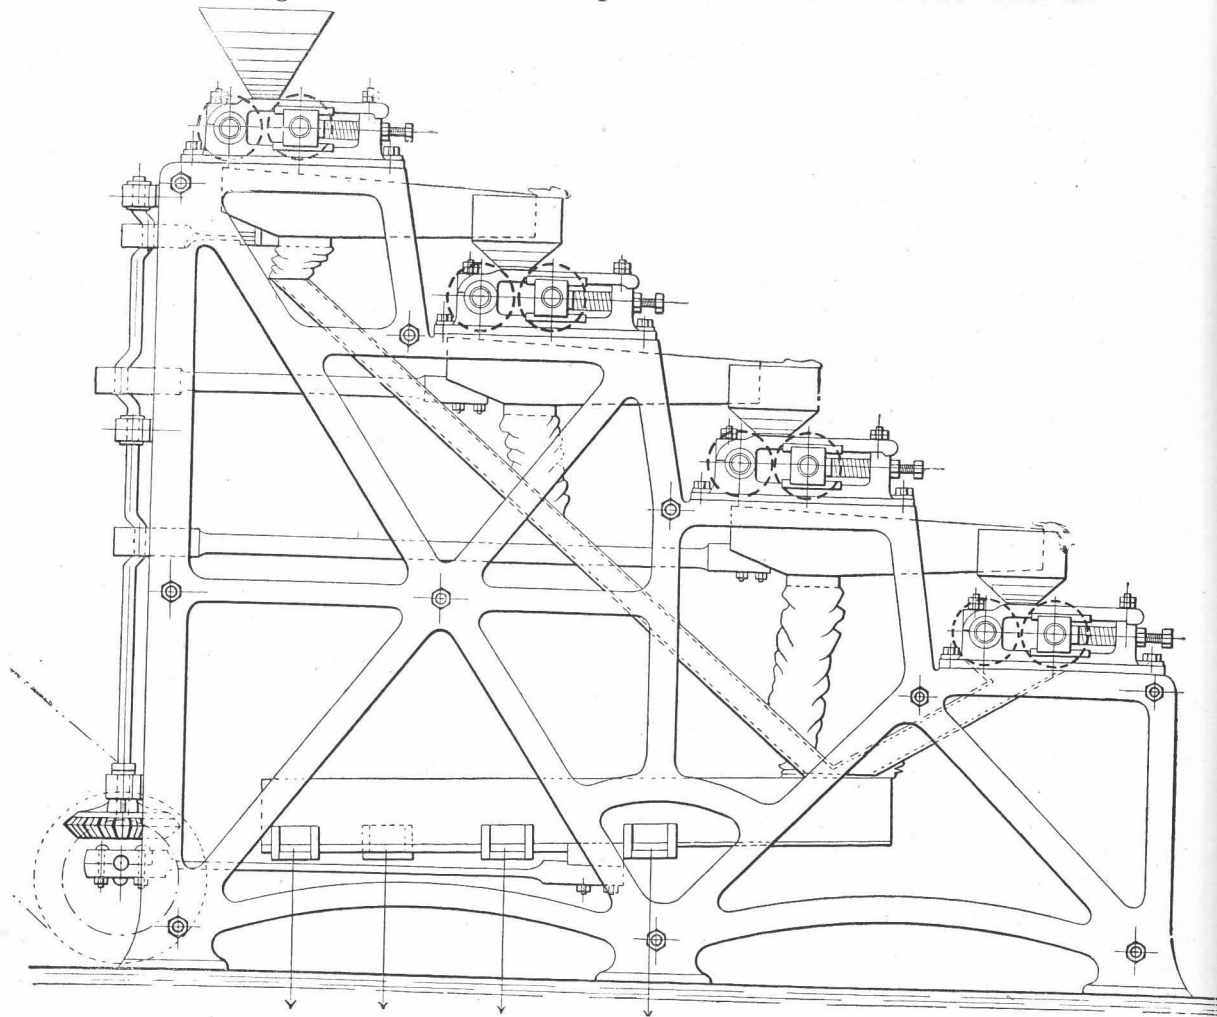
Corning Machine, made by Maschinenbau A.-G. Golzern-Grimma
